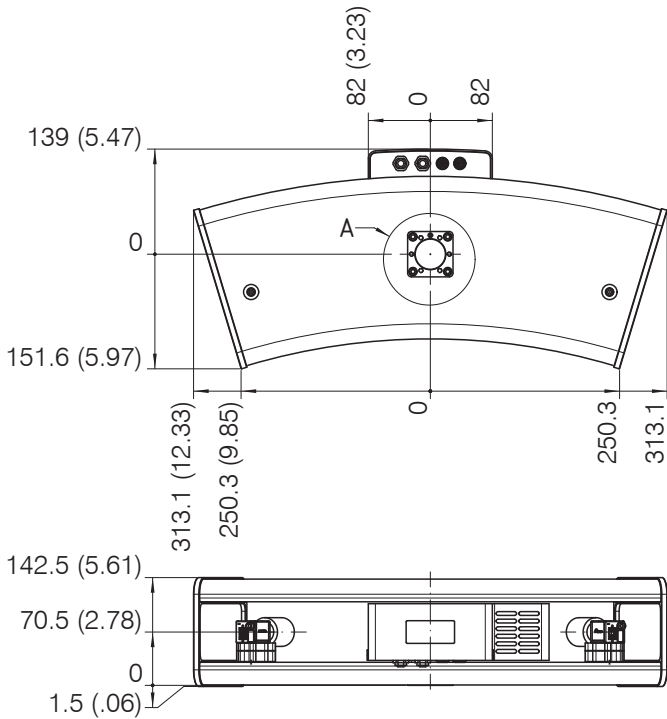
Dimensional drawing of surfaceCONTROL 3D SC25x0 sensor, dimensions in mm (inches, rounded off)
